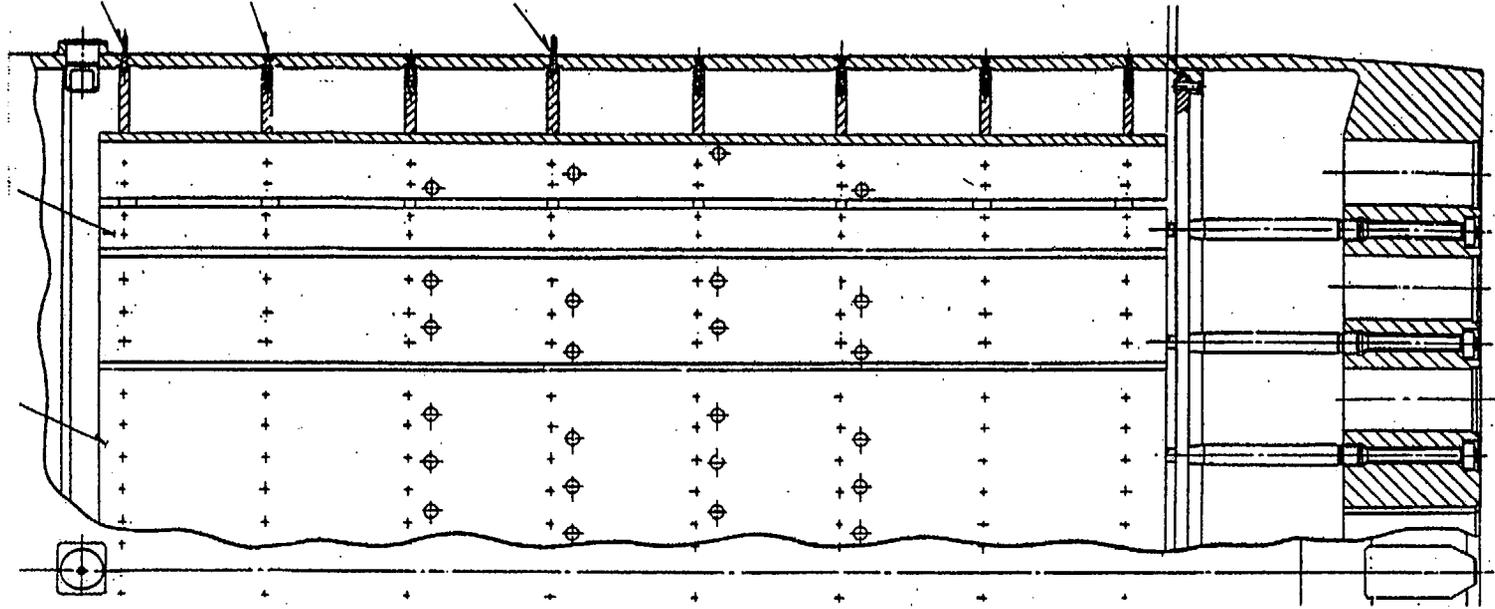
Baffle-Former-Barrel Region Cutaway View Showing Baffle Holes
